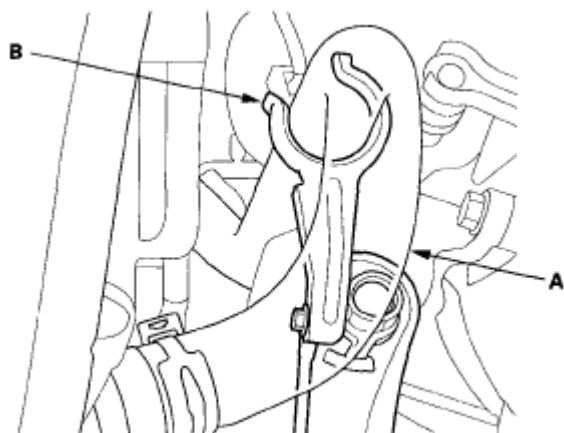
Identifying Lower Torque Rod Mounting Bolt
